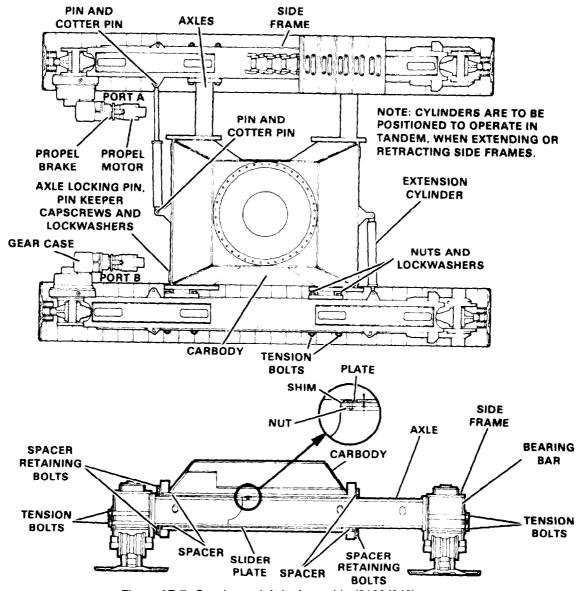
E-7. Crawler and Axle Assembly (2100J949)
